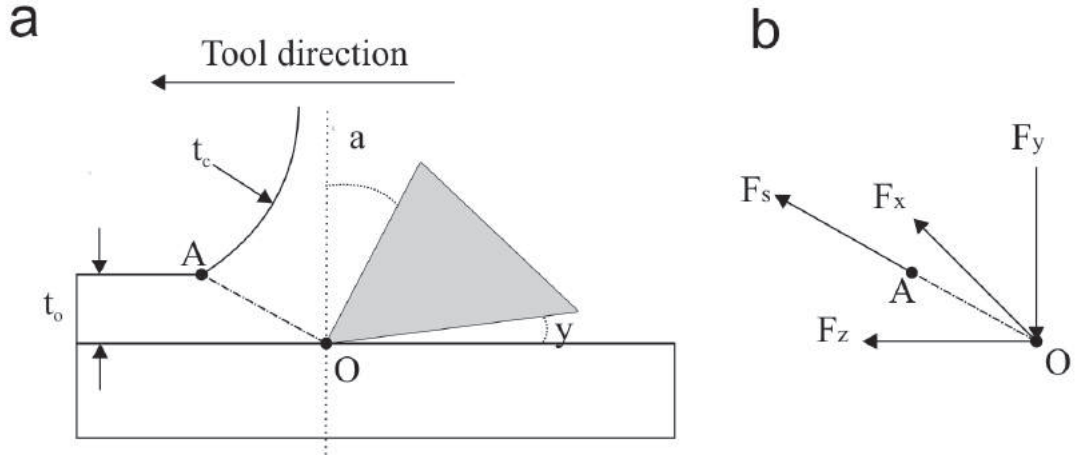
Schematic representation of a. the idealised cutting process with b. the cutting force components [55].
